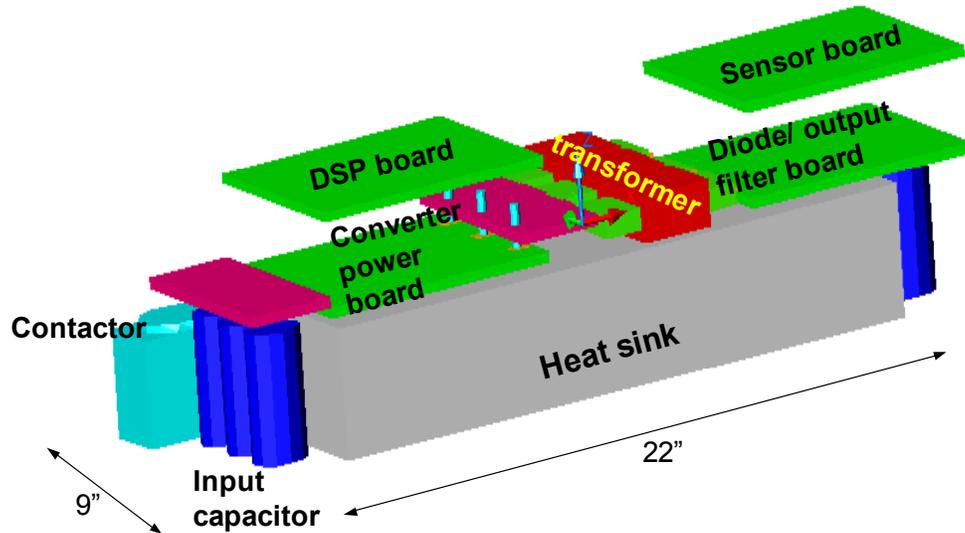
Autocad drawing for the planned final assembly of the entire dc/dc converter.
